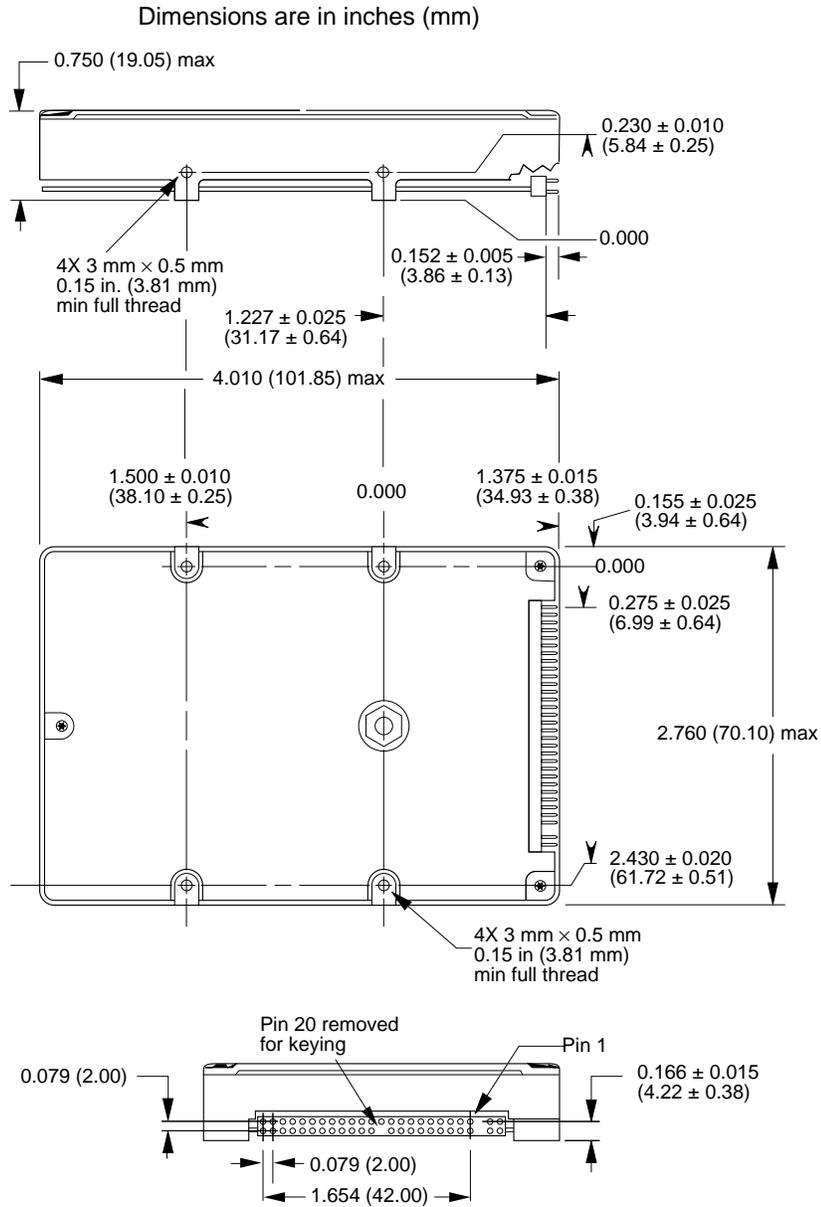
ST9235A and ST9235AG mounting dimensions (non-MCC mounting version)
